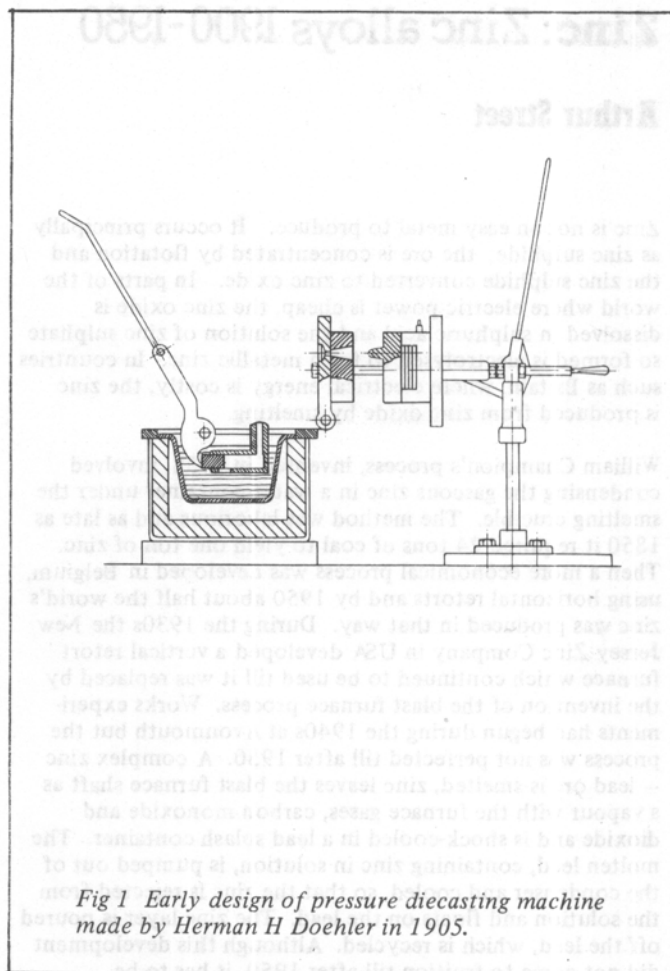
Early design of pressure diecasting machine made by Herman H Doehler in 1905.
